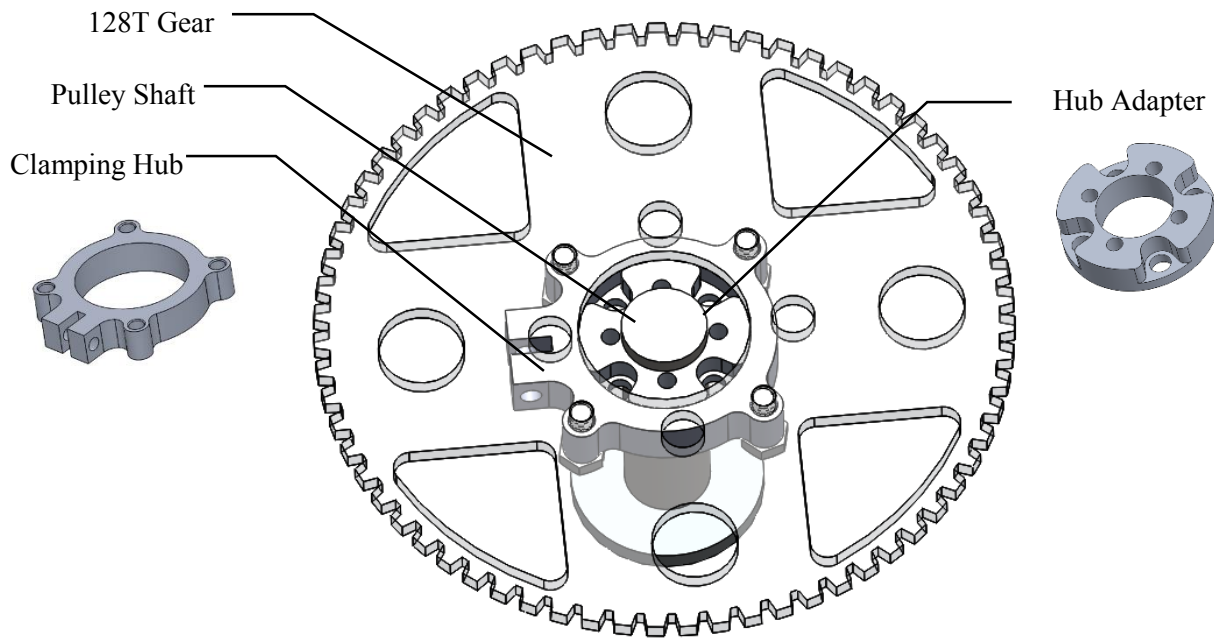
Top section view of transparent gear, displaying assembly of clamping hub and adapter
